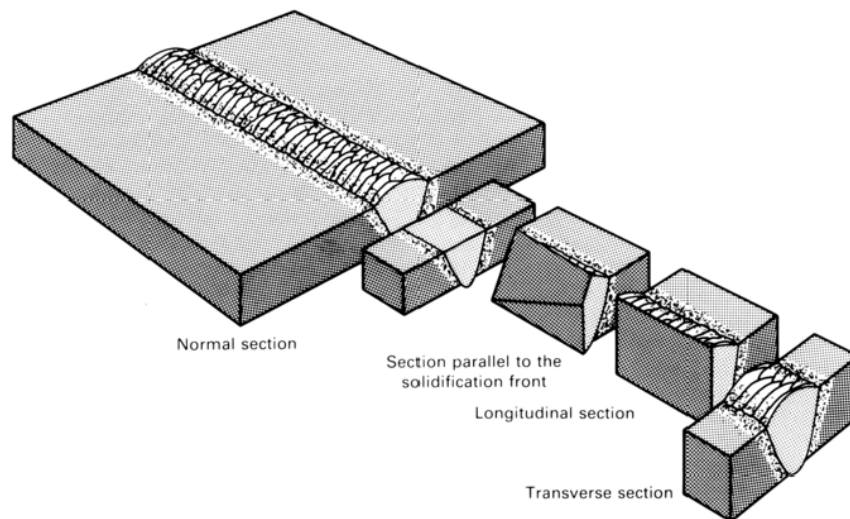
Different sectioning directions of a weldment that can help investigate different welding related problems (Davis, 1993)
